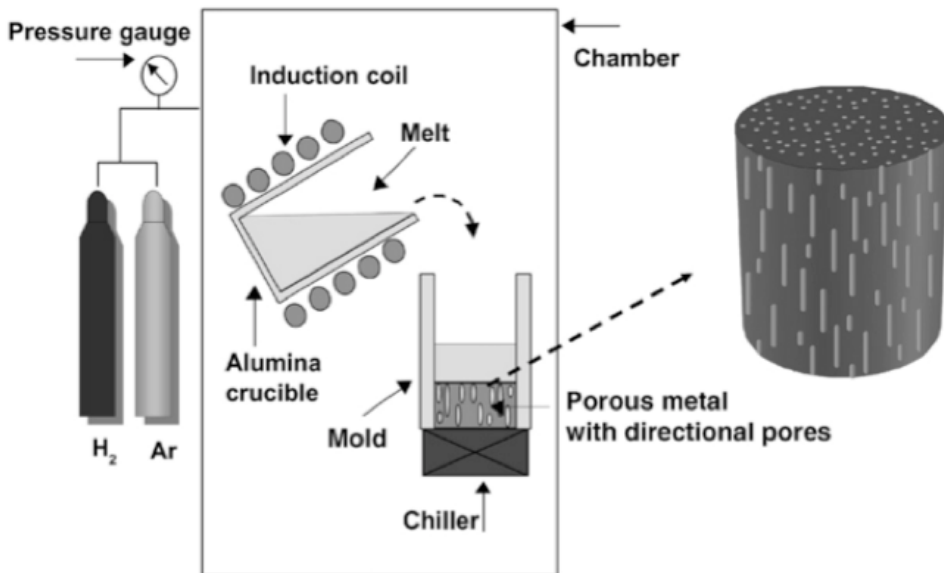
Mold casting technique for producing lotus-type and gasar-type porous metals.
